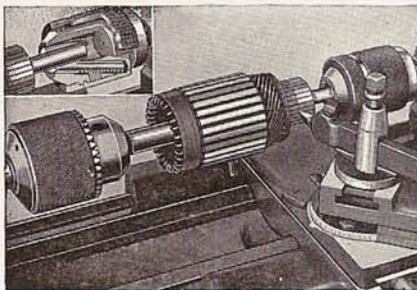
Centerless Armature Mounted in Lathe using Armature Support Bushing.
